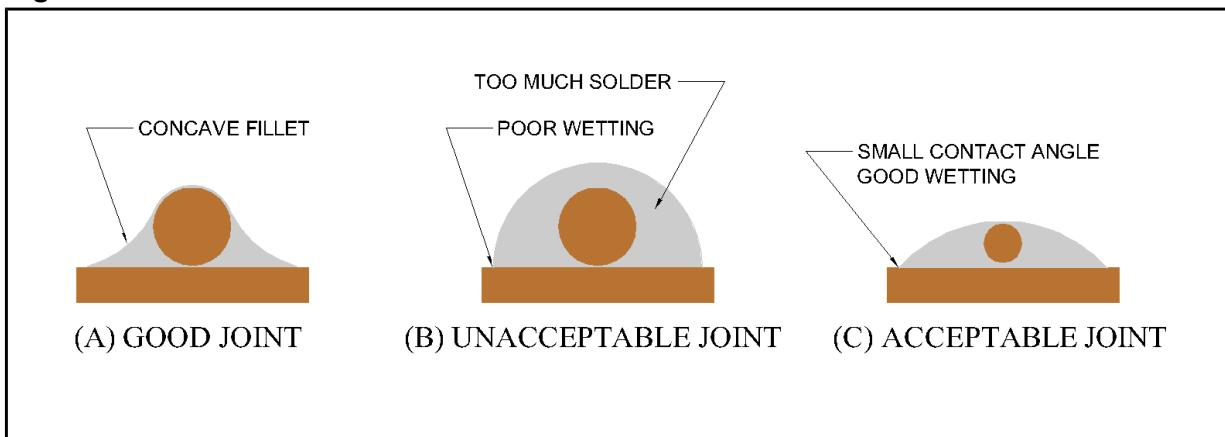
(B) shows an unacceptable joint with poor wetting and too much solder used. If solder reached to the end of the copper, it is possible that wetting and the joint could be okay, but too much solder has been used. It is not possible to tell, so the joint would still be unacceptable.
